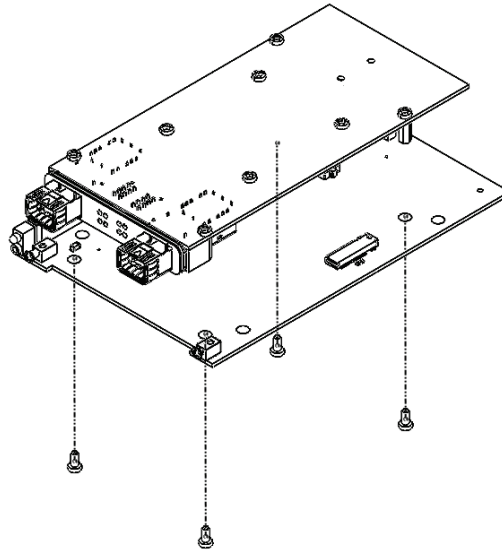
CP3005 Board with MMEXT-XMC02 Extension Module and XMC Module
